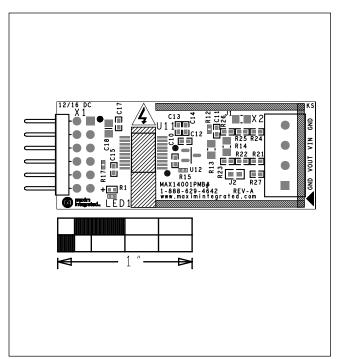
MAX14001PMB PCB Layout—SilkscreenTop
